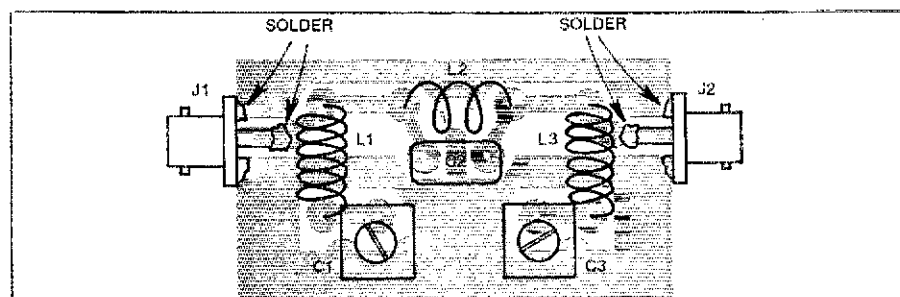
Parts-placement guide for the filter. The shaded area represents an X-ray view of the copper pattern. The two BNC connectors are each soldered to the board in three places as shown.
